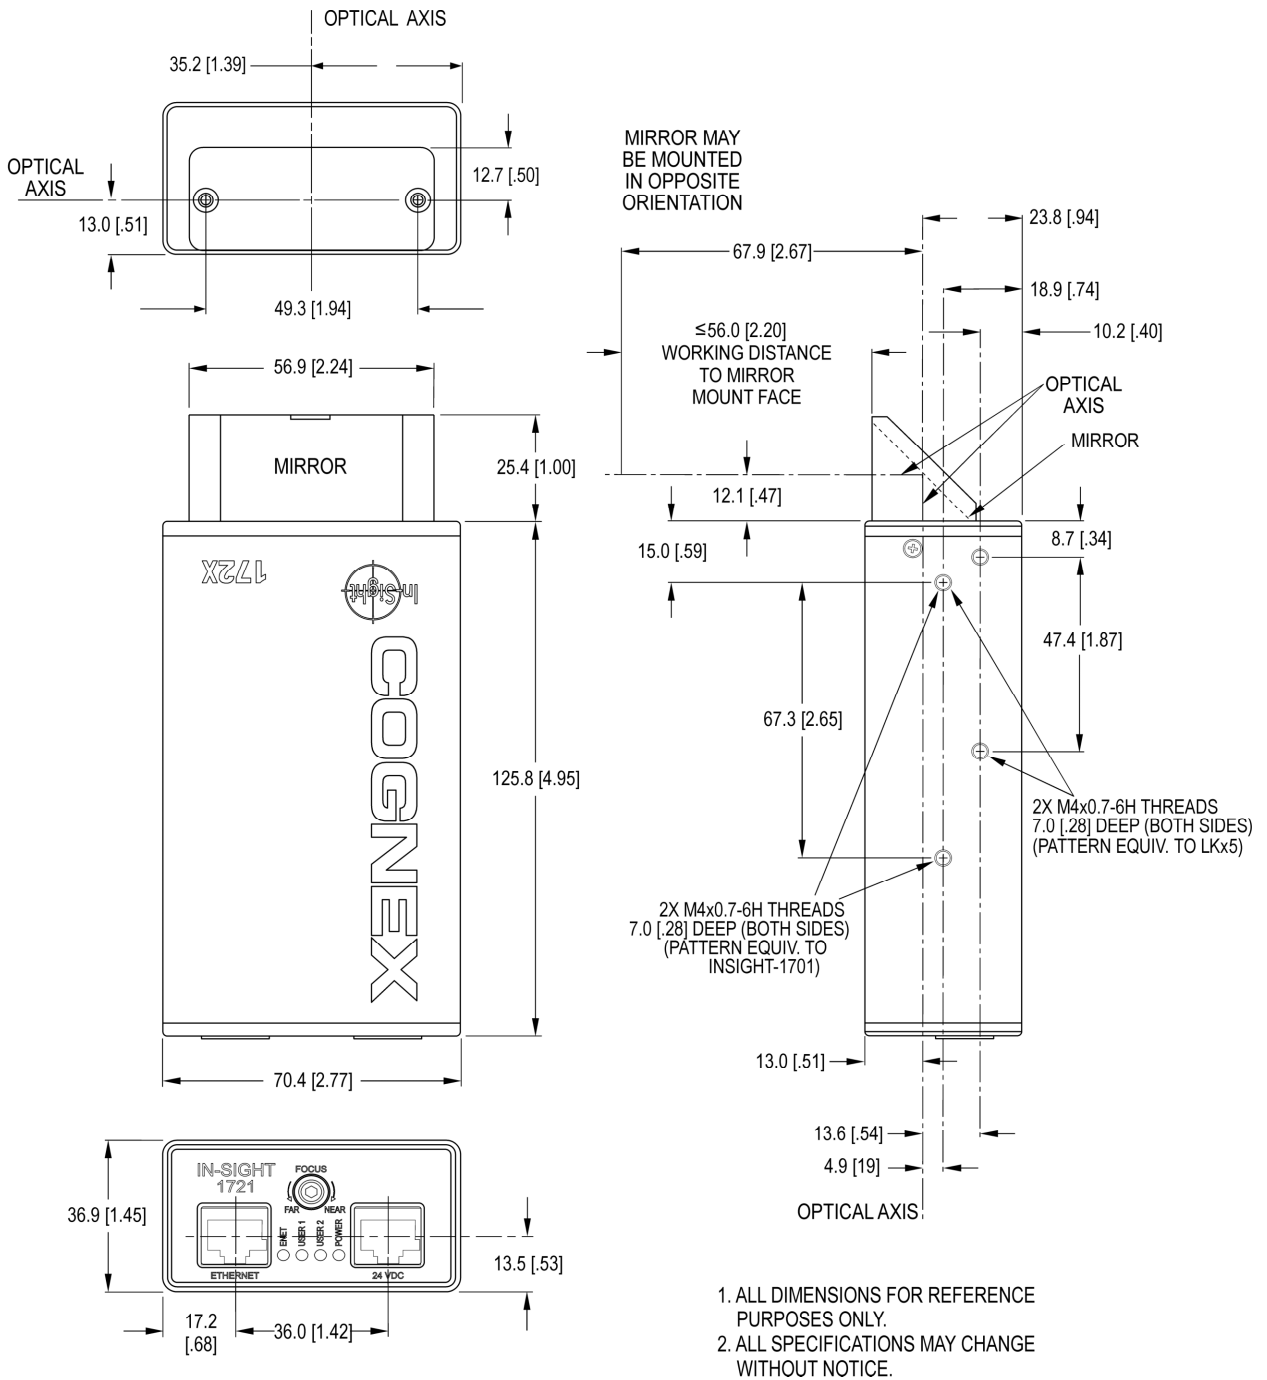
In-Sight 1720 Series Wafer Reader Dimensions with Horizontal Mirror Mount (Recommended Horizontal Configuration)
